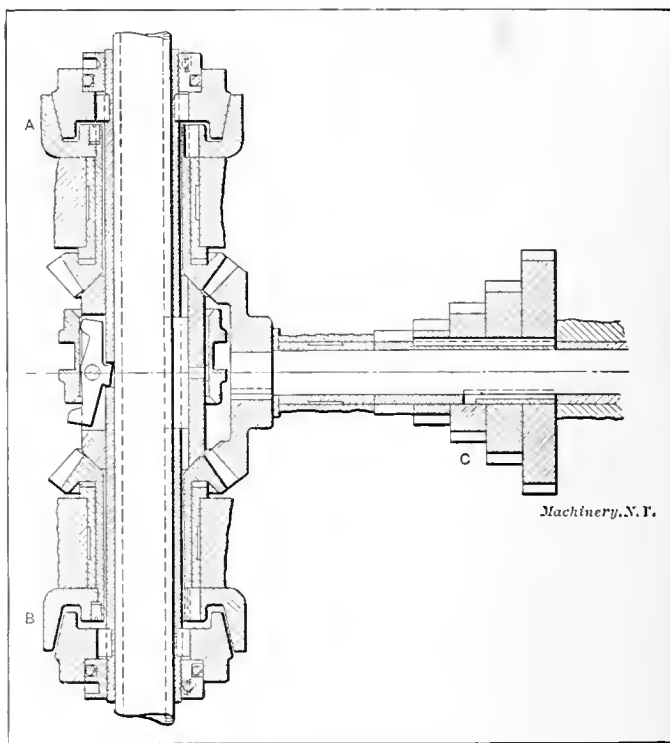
Friction Clutches by means of which Machine is started, stopped and reversed
